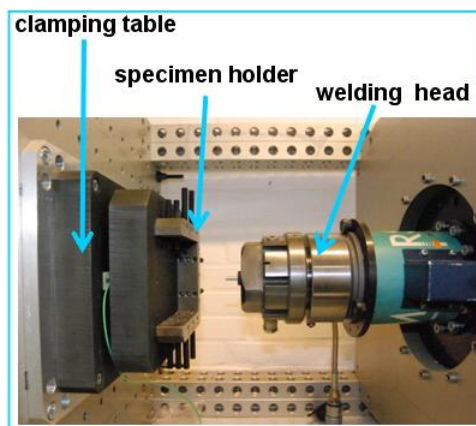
RSM 400 welding system used for FricRiveting
